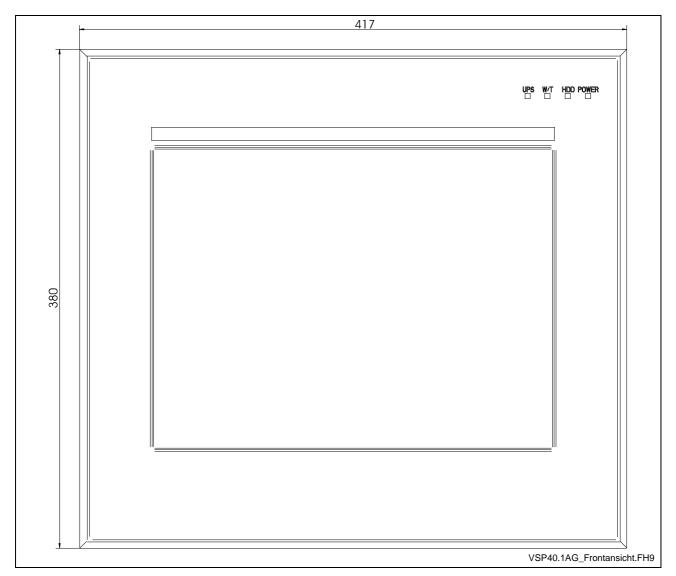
Dimensions, front panel of the VDP 40.1AL
